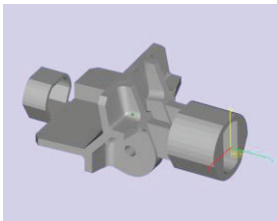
CAD model for hinge part including machining allowance and sacrificial fixture
